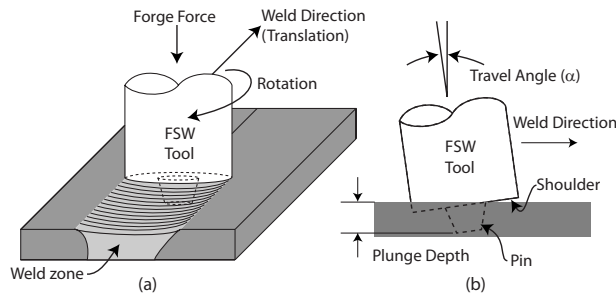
Schematic of friction stir welding: (a) process and (b) tool travel angle and plunge depth
